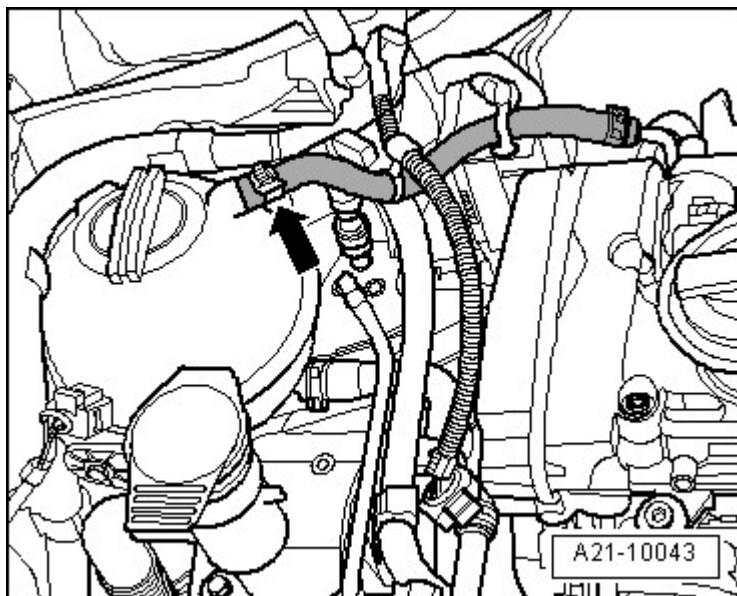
Disconnecting Coolant Line To Coolant Expansion Tank
